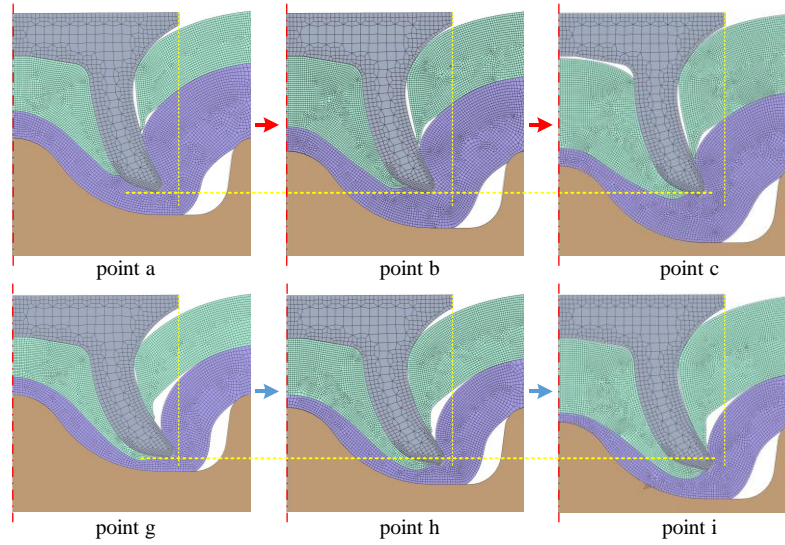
Deformed rivet shank in the SPR joints with different top and bottom sheet thicknesses
